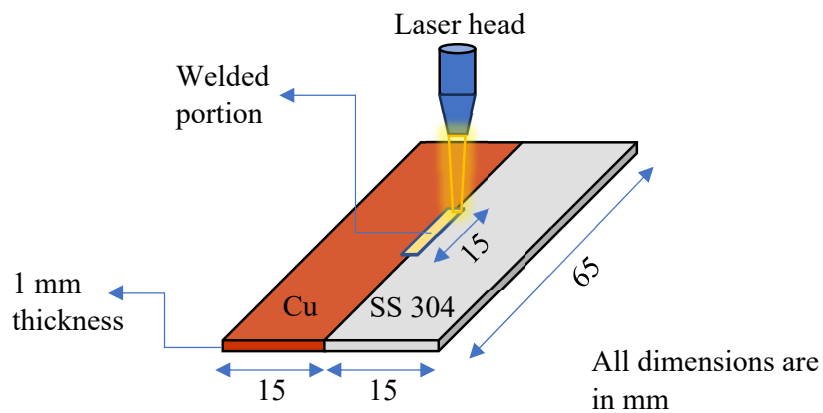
Schematic view of ongoing laser welding on workpiece
